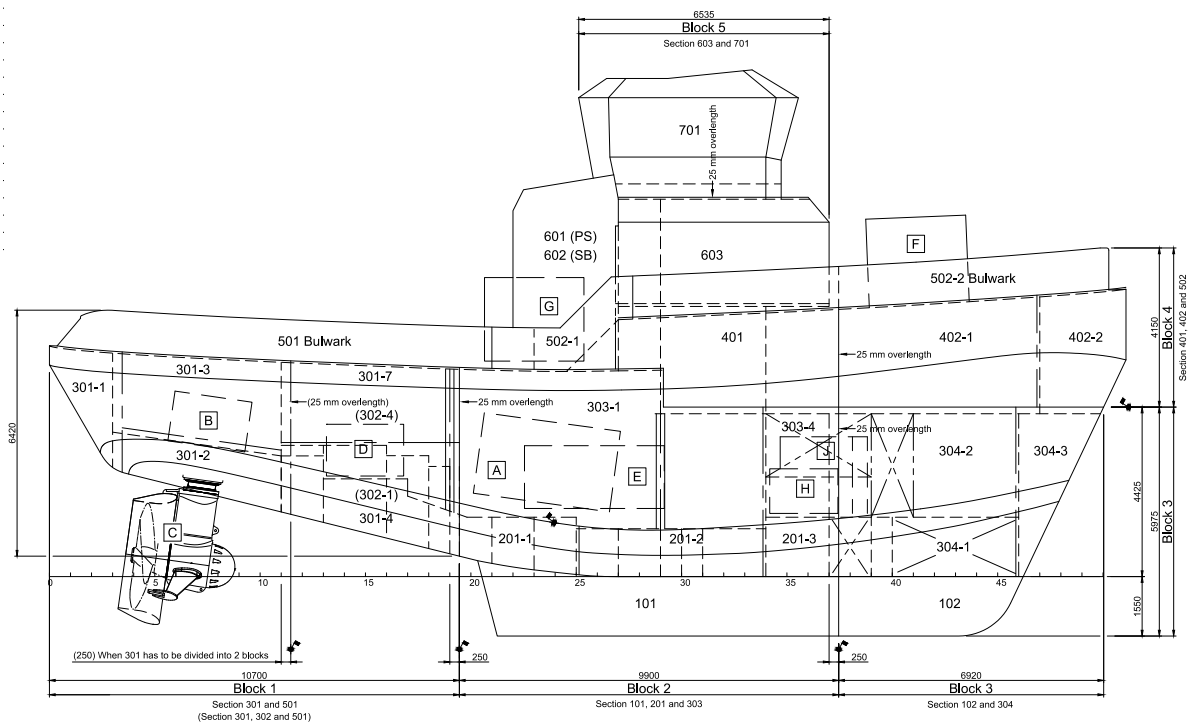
Section plan of a Damen ASD2913 Tugboat (Damen, 2015)
